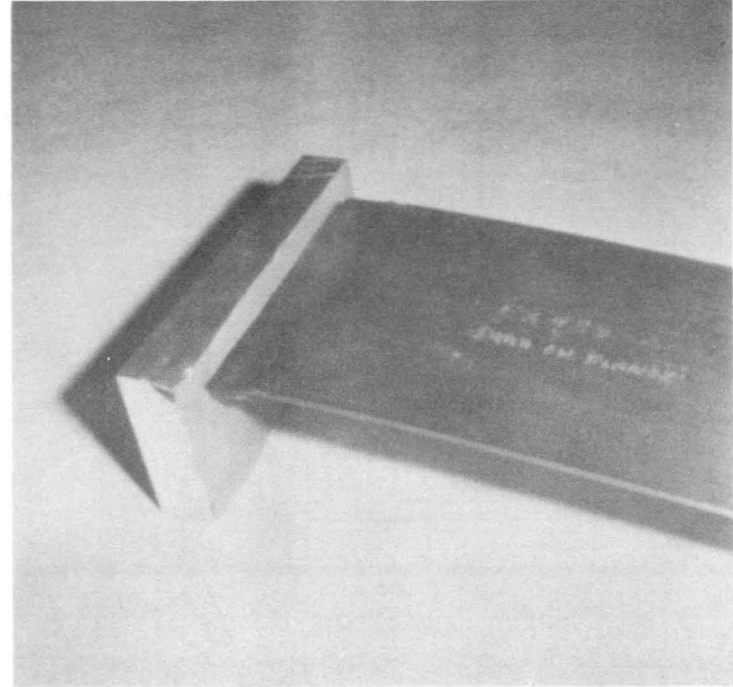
Typical Failure Mode - Heavily Loaded Hat-Stiffened Skin-Stringer Repaired Panel Tested at Room Temperature, Specimen EX493-2
